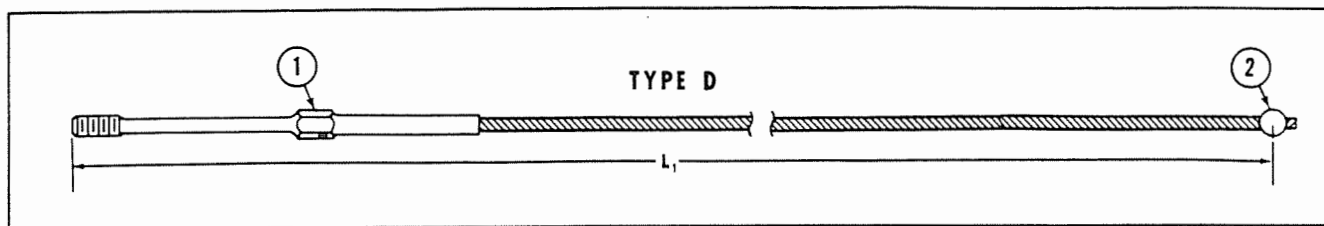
(Sheet 7 of 7 Sheets). Mechanical Safety Latch Control System – Cable Assembly
